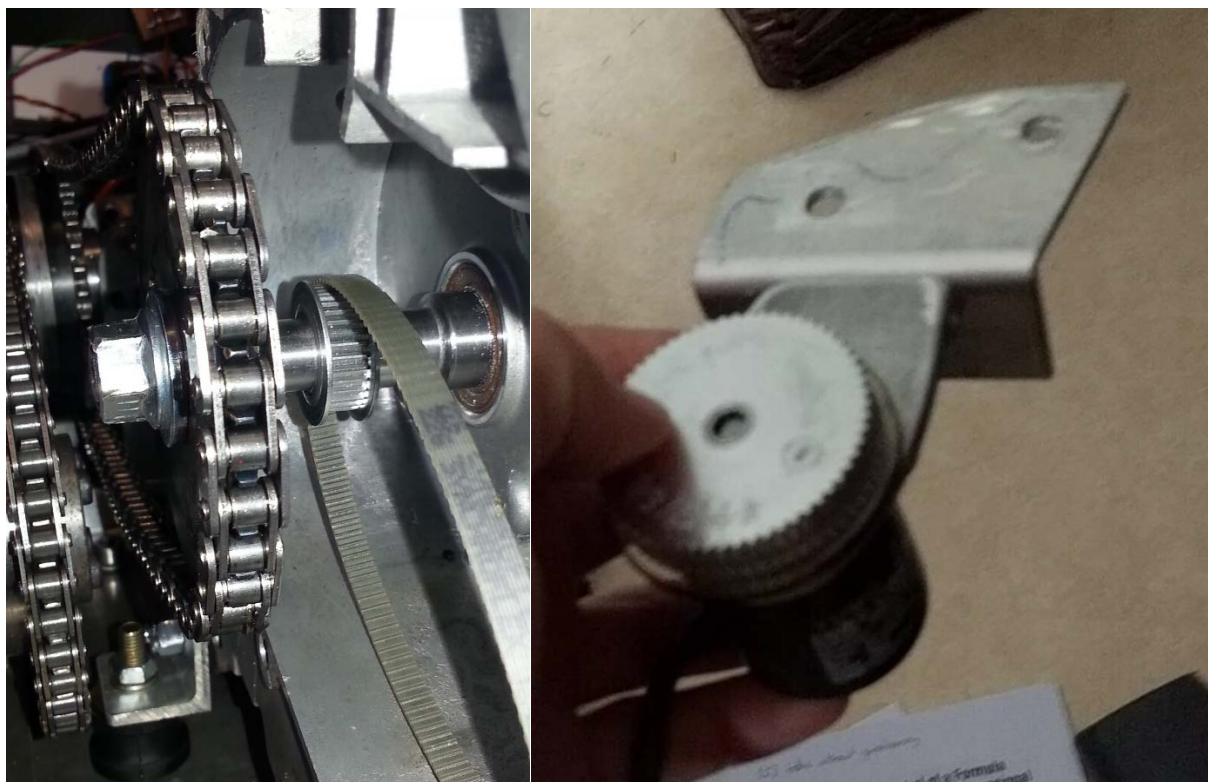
Encoder setup. To the left, pulley and belt mounted on crankshaft on the output side of engine. To the right, encoder mounted on bracket which was bolted on engine
